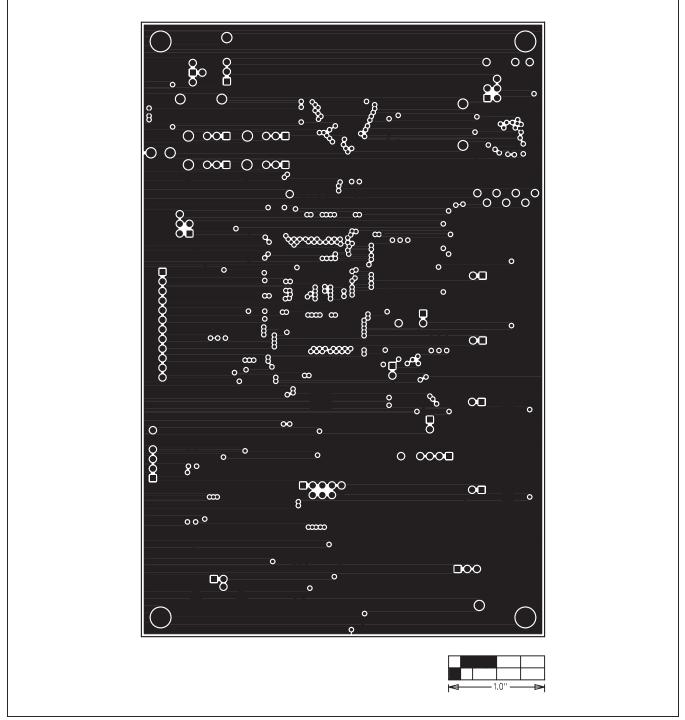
MAX44005 EV Kit PCB Layout—Layer 2
